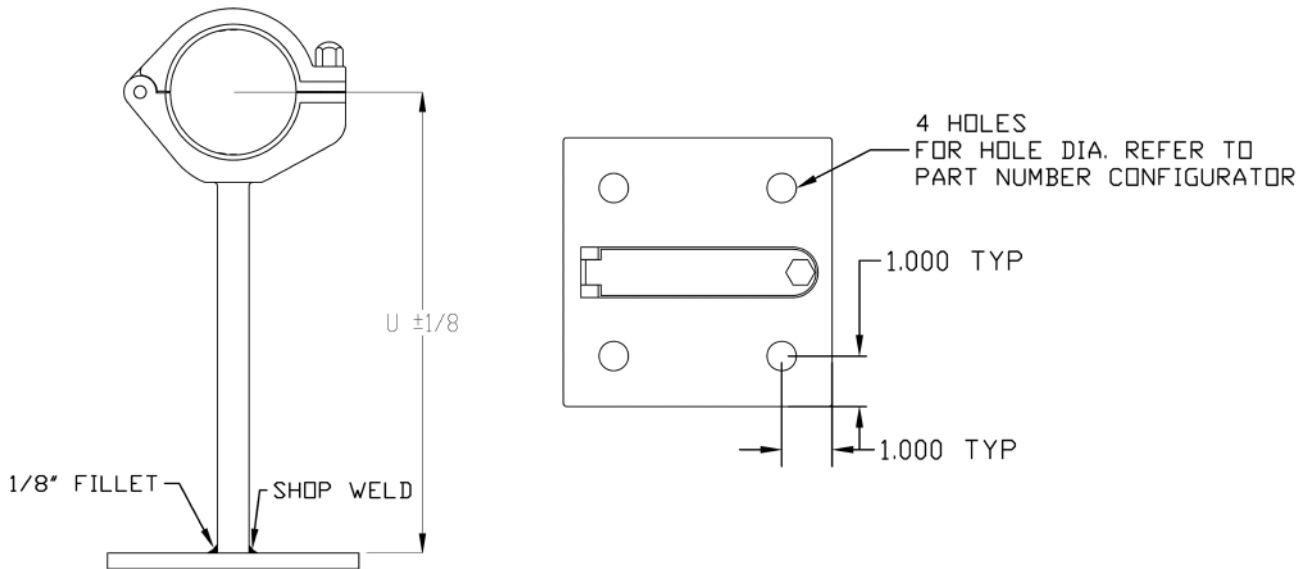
CH Series Rod Stand Plate - Part Number Configurator
